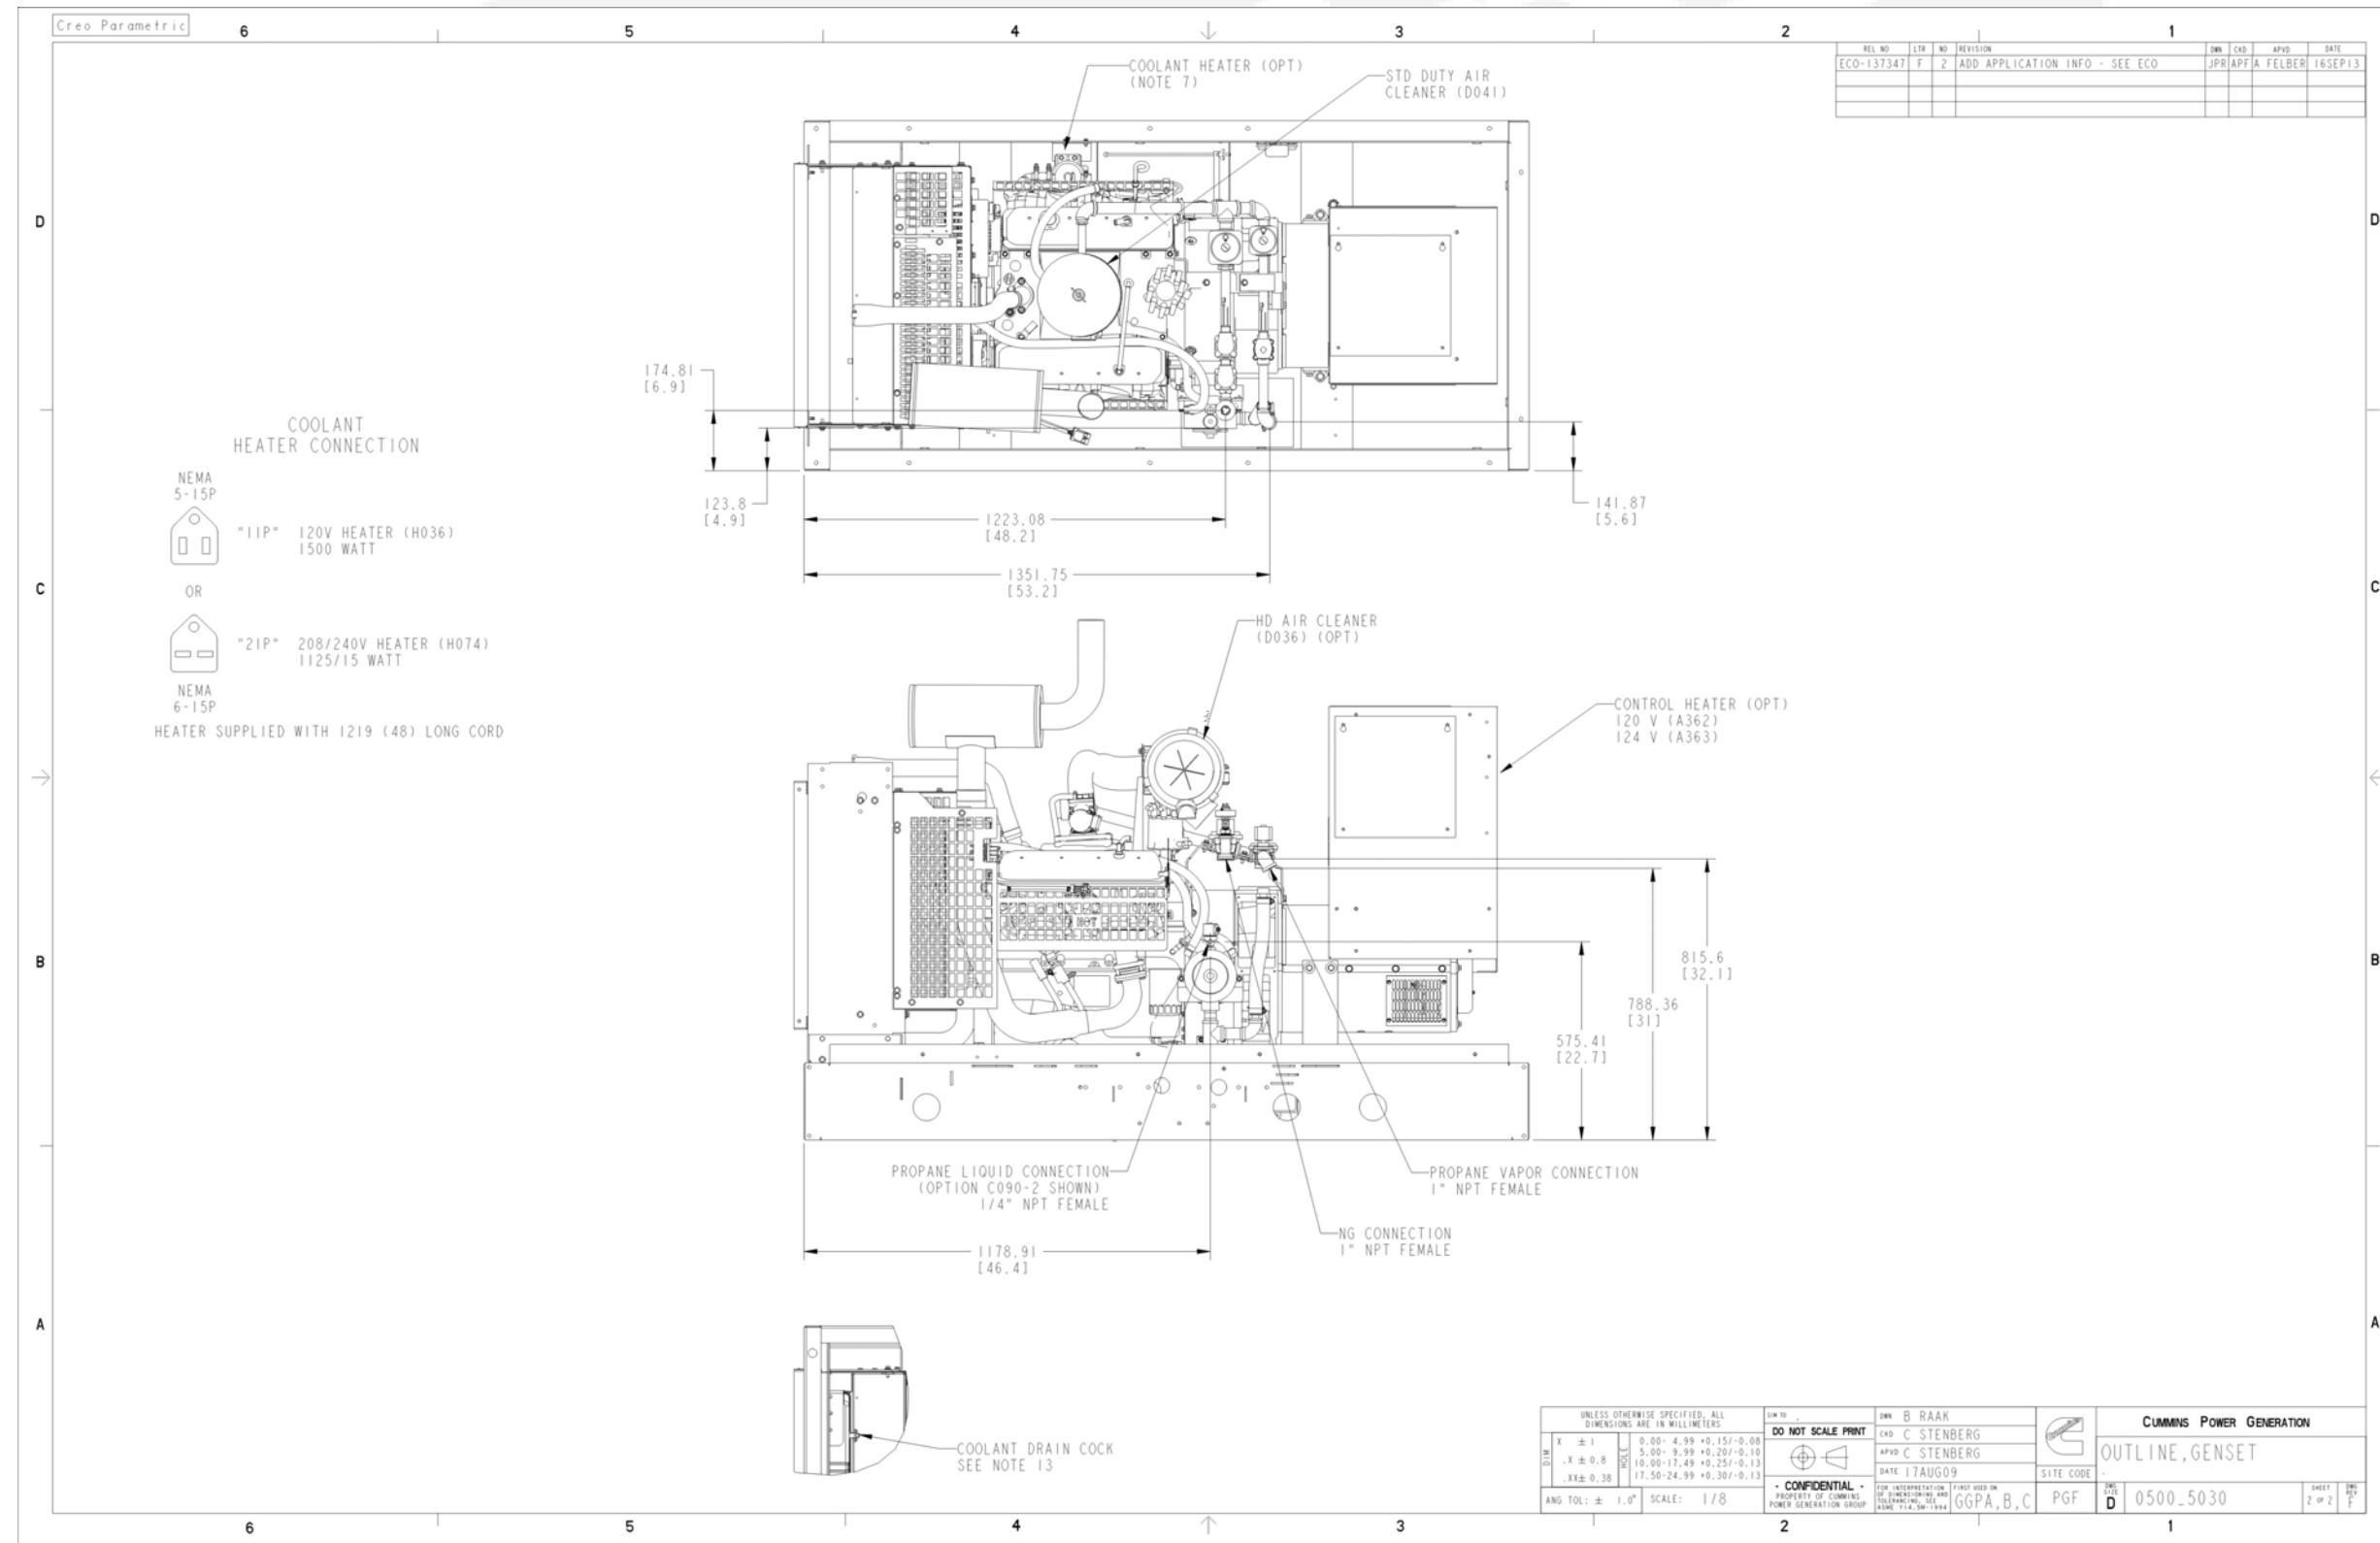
OUTLINE DRAWING (0500-5030 SHEET 2)
